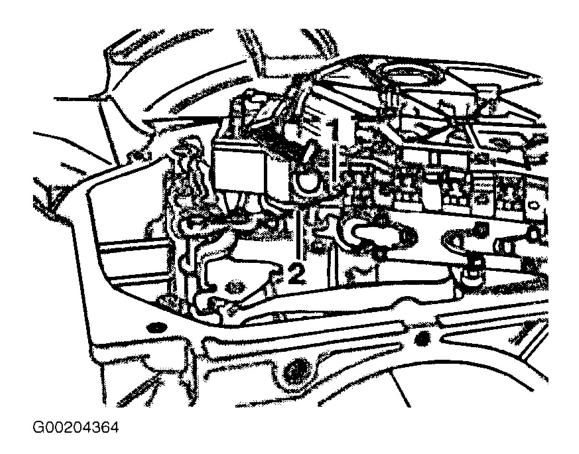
Removing Valve Body & Unhooking Operating Rod Courtesy of VOLKSWAGEN UNITED STATES, INC.
